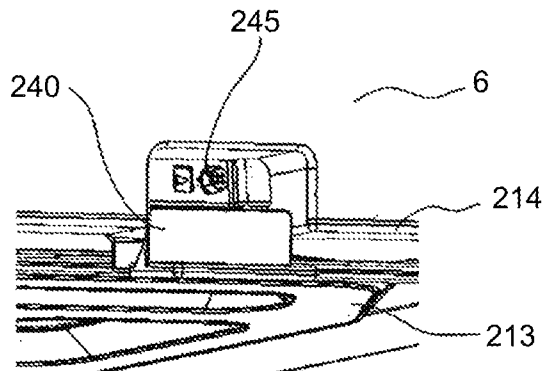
IMAGE FORMING APPARATUS HAVING DRAWER UNIT
